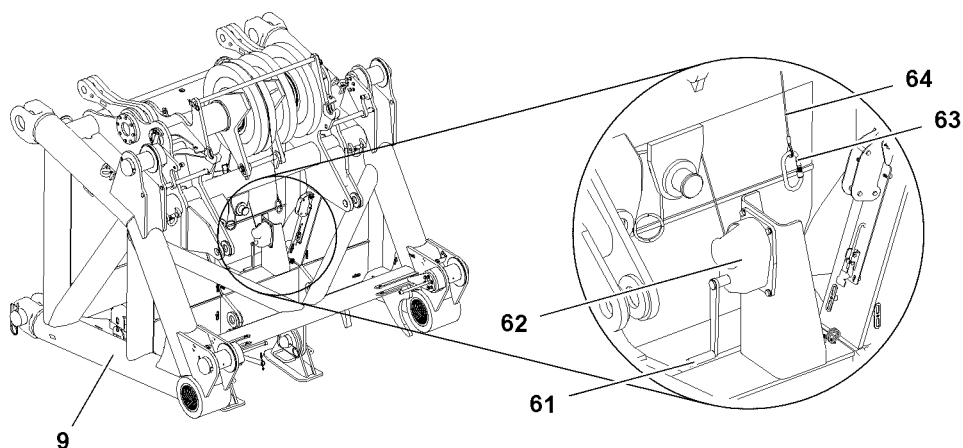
Install the retaining frame on the W-connector head - spool the wire rope up
